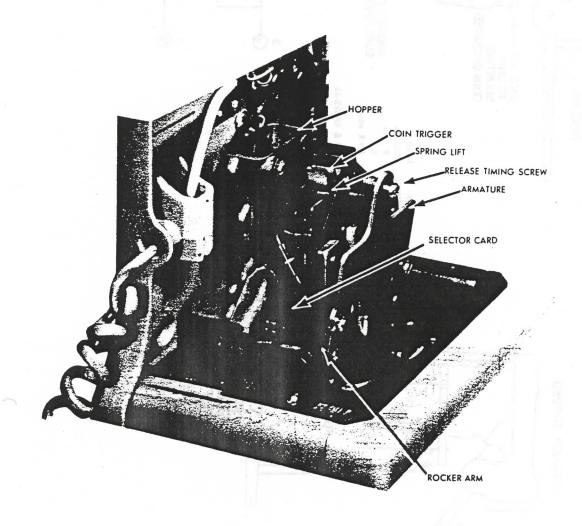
Single-Coil Coin Relay, Shown Installed, With Cover Removed.
